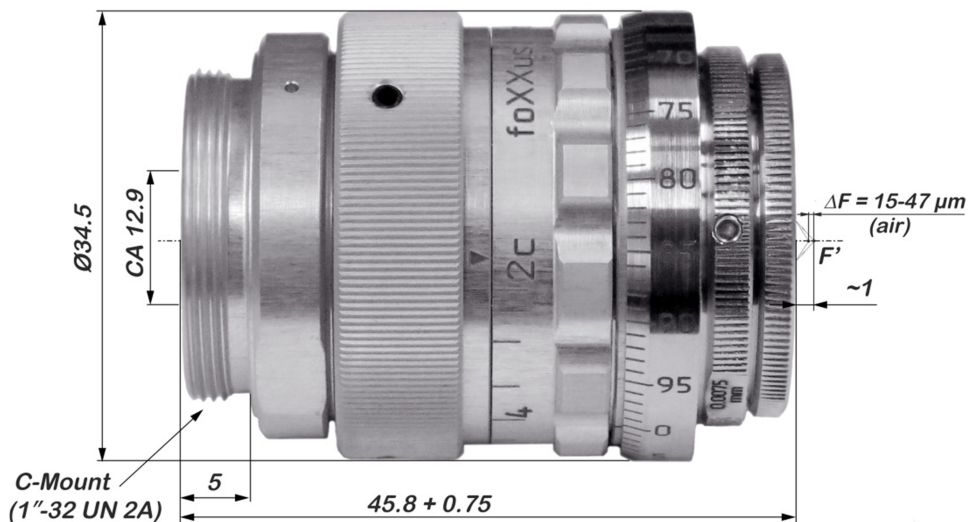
foXXus with overall and mounting dimensions, with installed Adapter C-Mount Ext/Int 6 mm.
